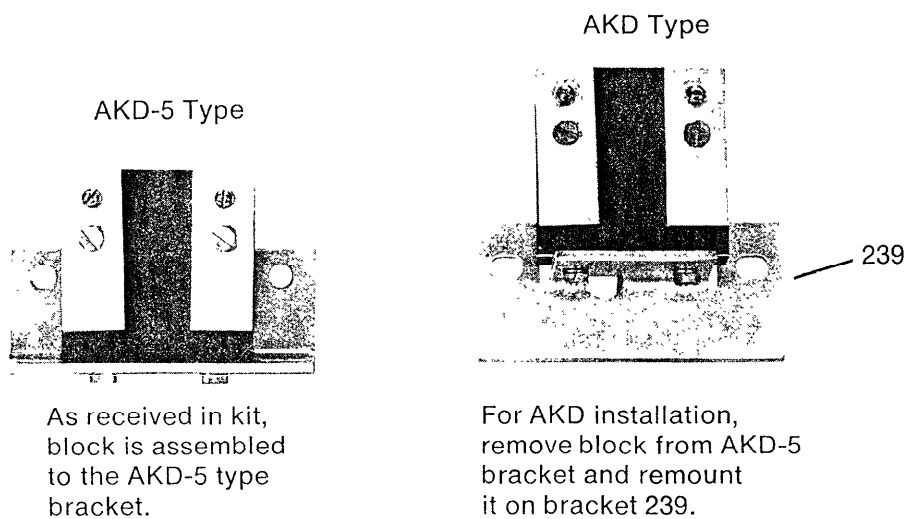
Selection of mounting brackets for attaching the 4th-wire neutral sensor disconnect block to AK-75 & 100 drawout breakers.
